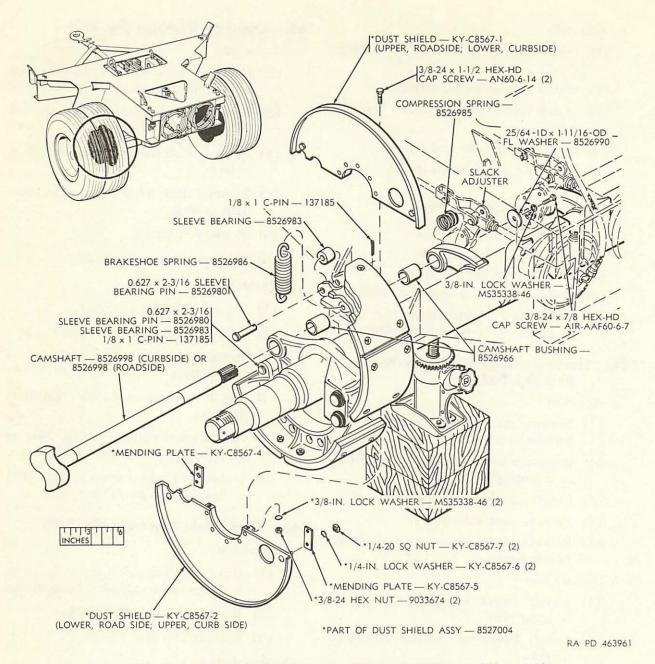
Brakeshoe camshaft bushings, sleeve bearings, and dust shield assembly – removal and installation – typical.
